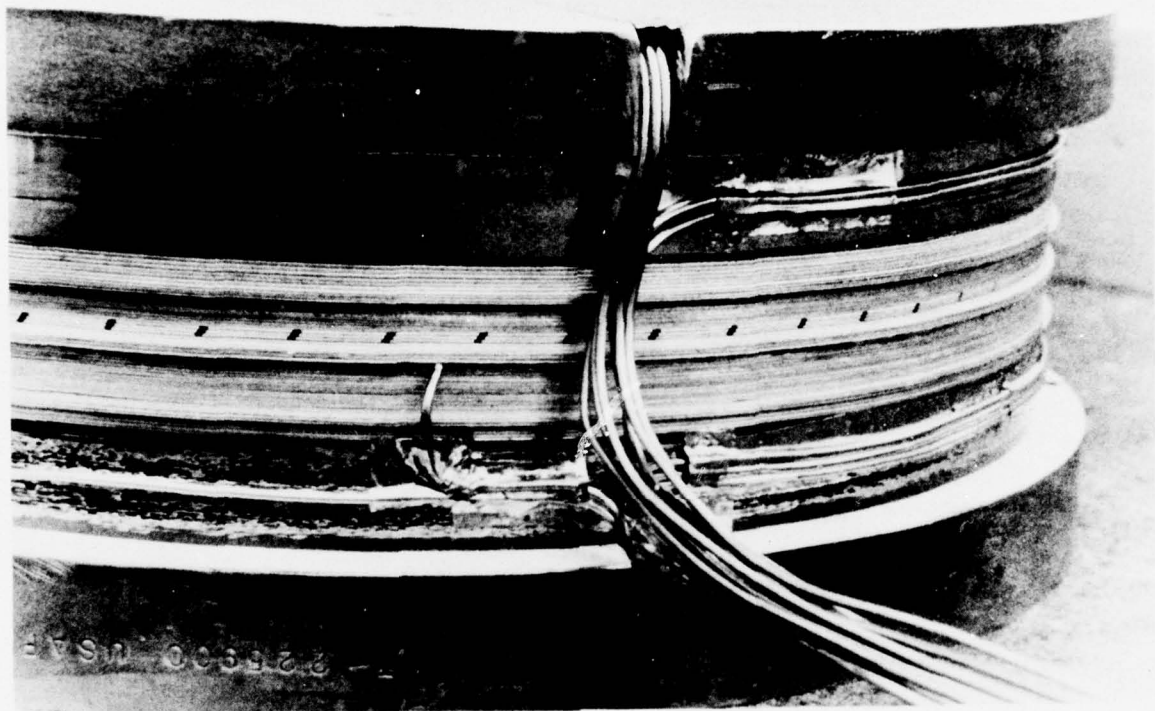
Sequentially Assembled Wheel Blank Laminates on the Bond Fixture with the Thermocouples Installed.
